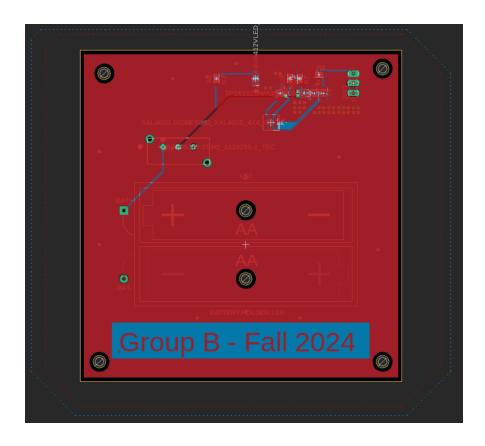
Custom PCB With Pour (Second Revision)
